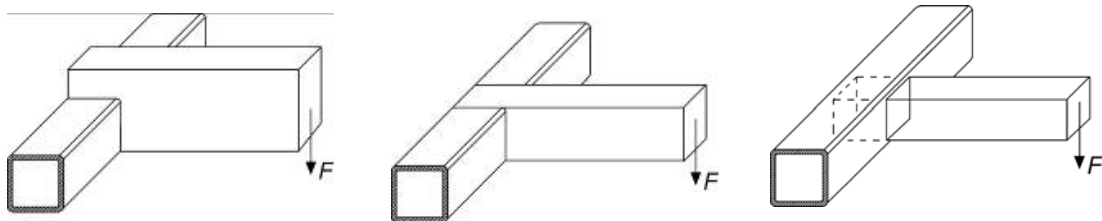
Alternative ways to prevent cross-section distortion (Yrjölä 2008).
